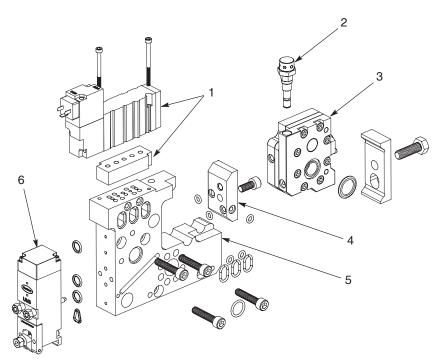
Components typically mounted on a manifold slice (manifold-mounted solenoid valve shown)
